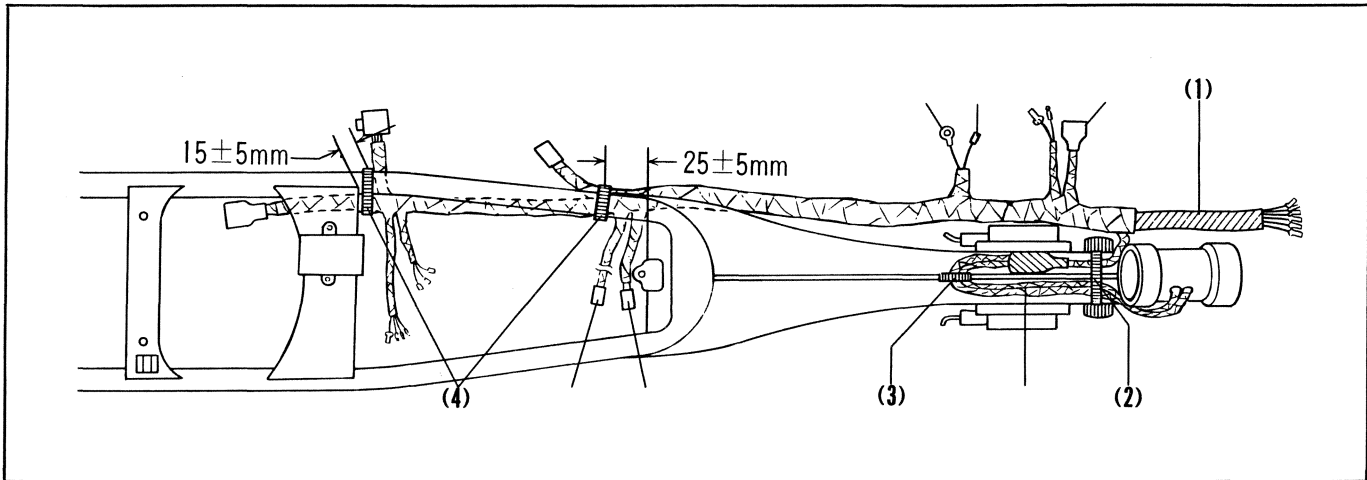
(1) Wire harness (2) Wire harness clip A (3) Wire harness clip B (4) Wire band
